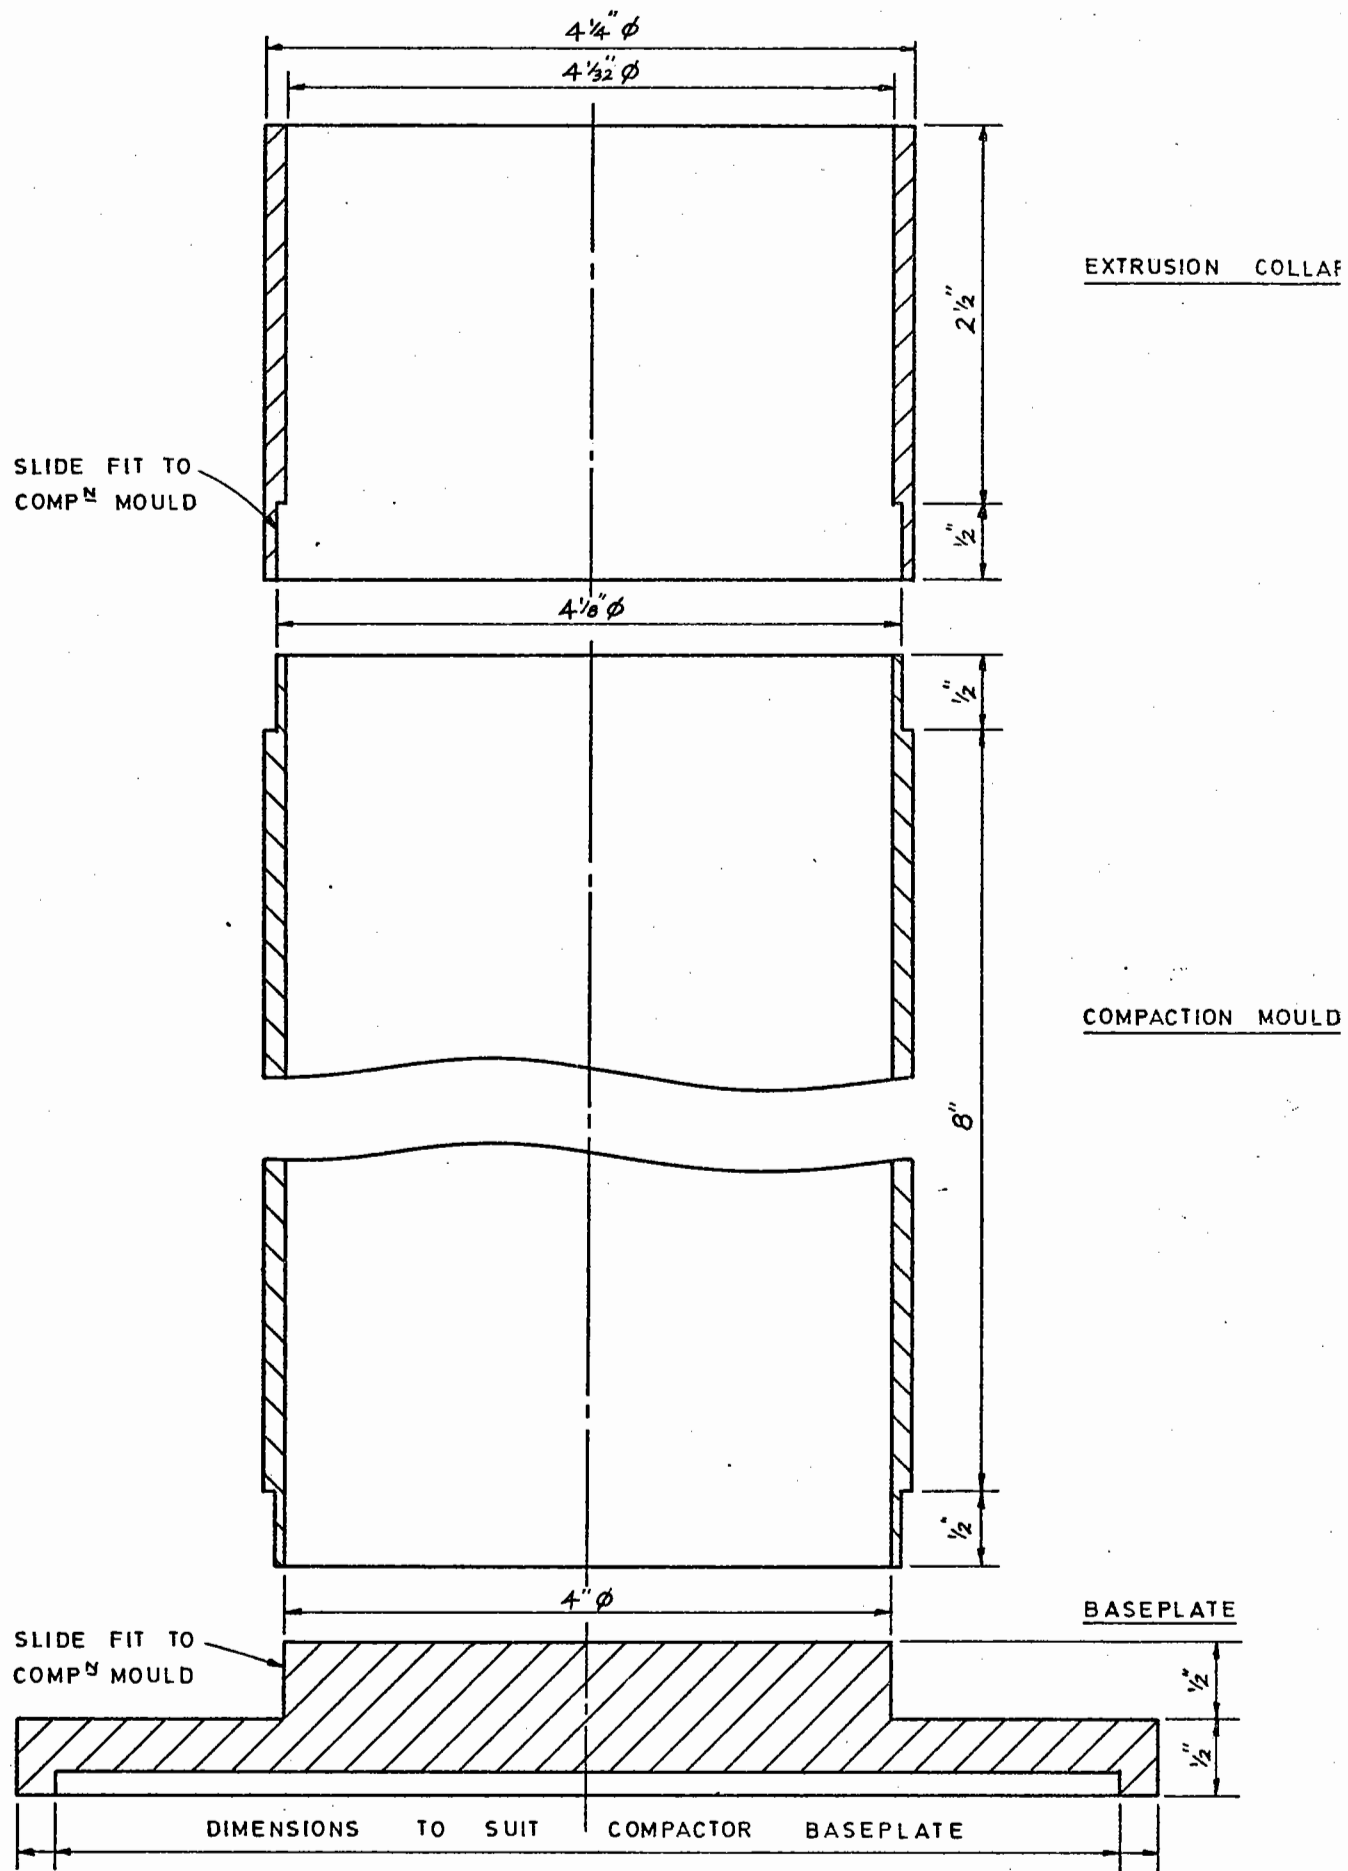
DETAILS OF EXTRUSION COLLAR, COMPACTION MOULD AND BASEPLATE
